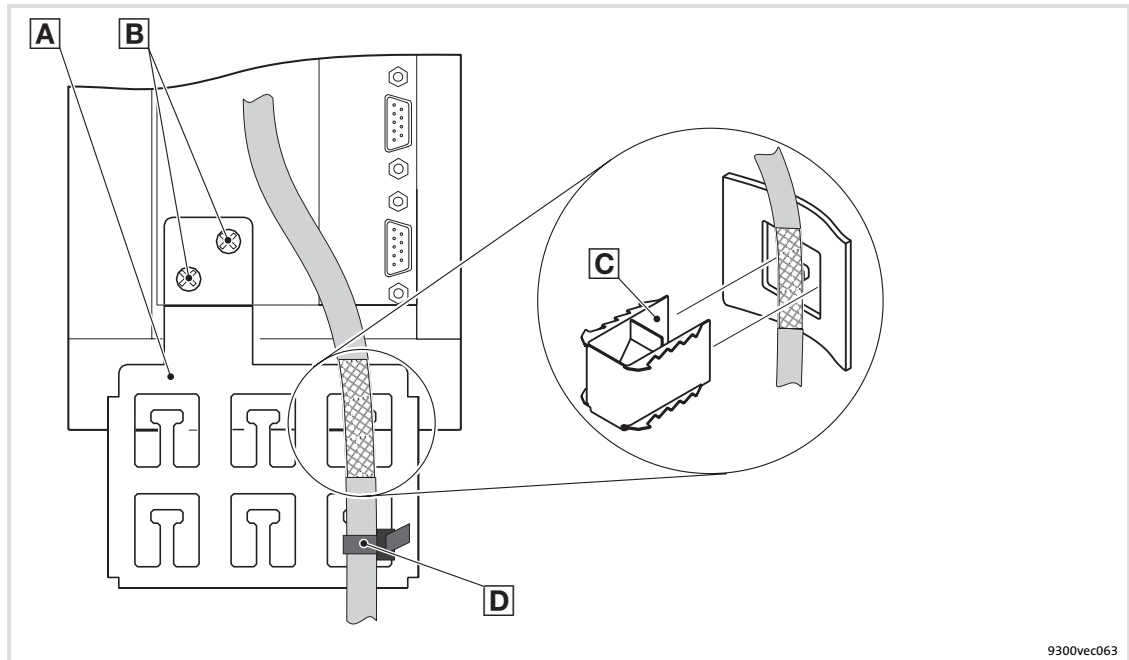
Connection of the cable shield with shield clip and strain relief with cable binder
